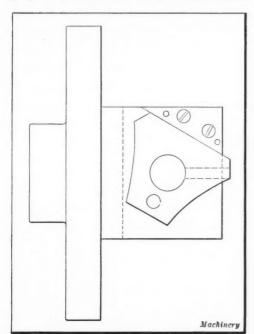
Holding Gage for boring and lapping Holes in Ends
